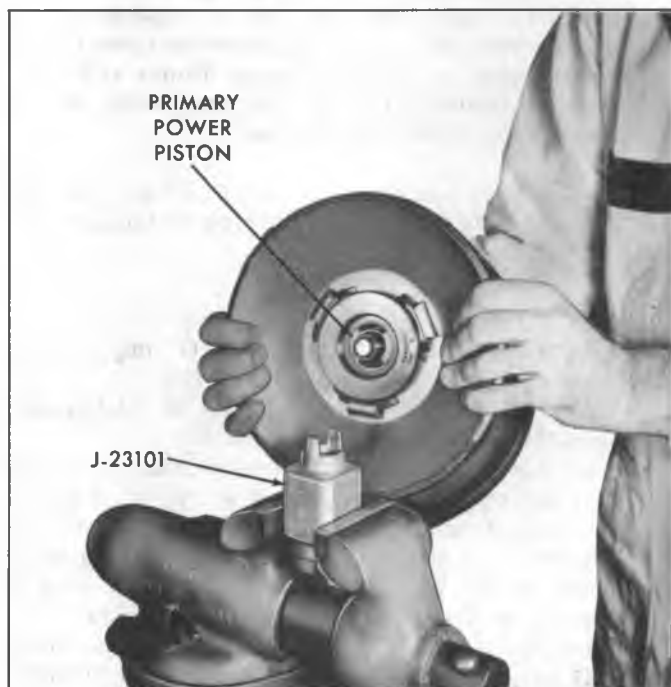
Positioning Primary Power Piston In Tool J-23101 (Small Dia. End Up)
